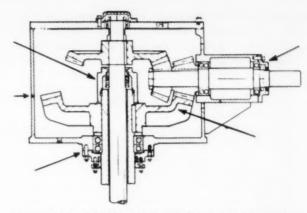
Design of double motion drive head. (Courtesy Struthers Wells Corp.)  $\,$
